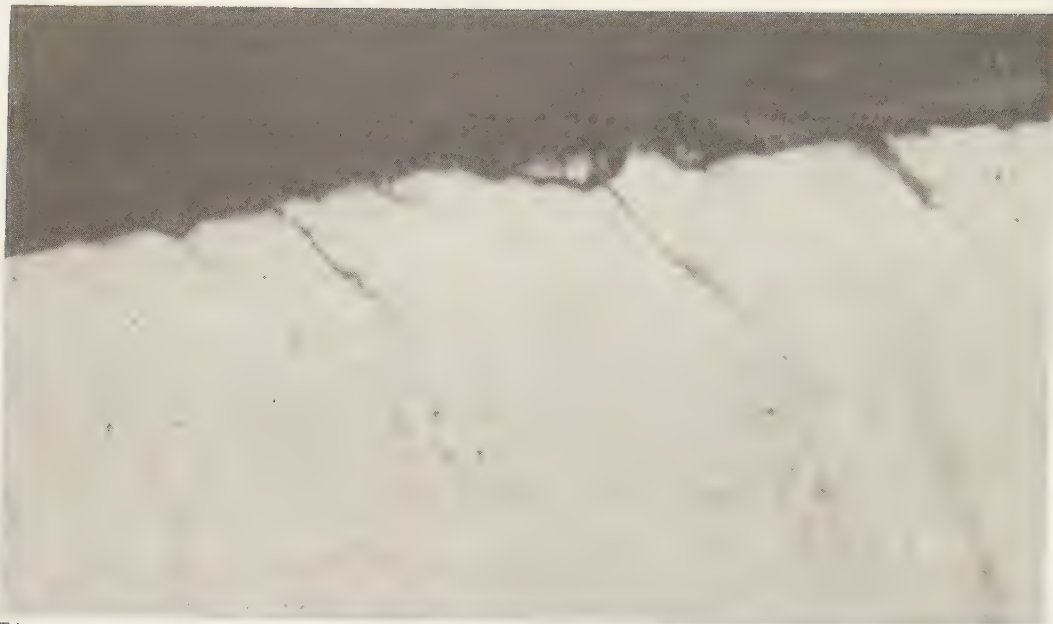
Section with microcracks at fretting damaged area. Specimen No. 28 with solid lubricant coated surface.
